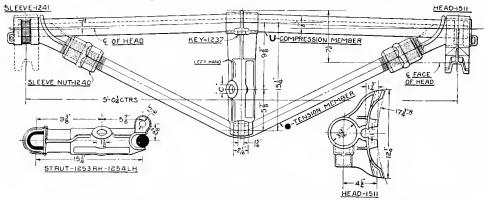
P C Creco Brake Beam for Heavy Service with Four-Wheel Trucks.
